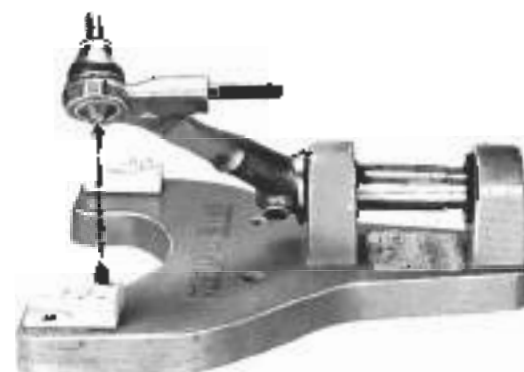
Late-type ball joint. Point on jig should contact test surface on ball joint. Torsion arm shown is not for a Type 2 vehicle.
